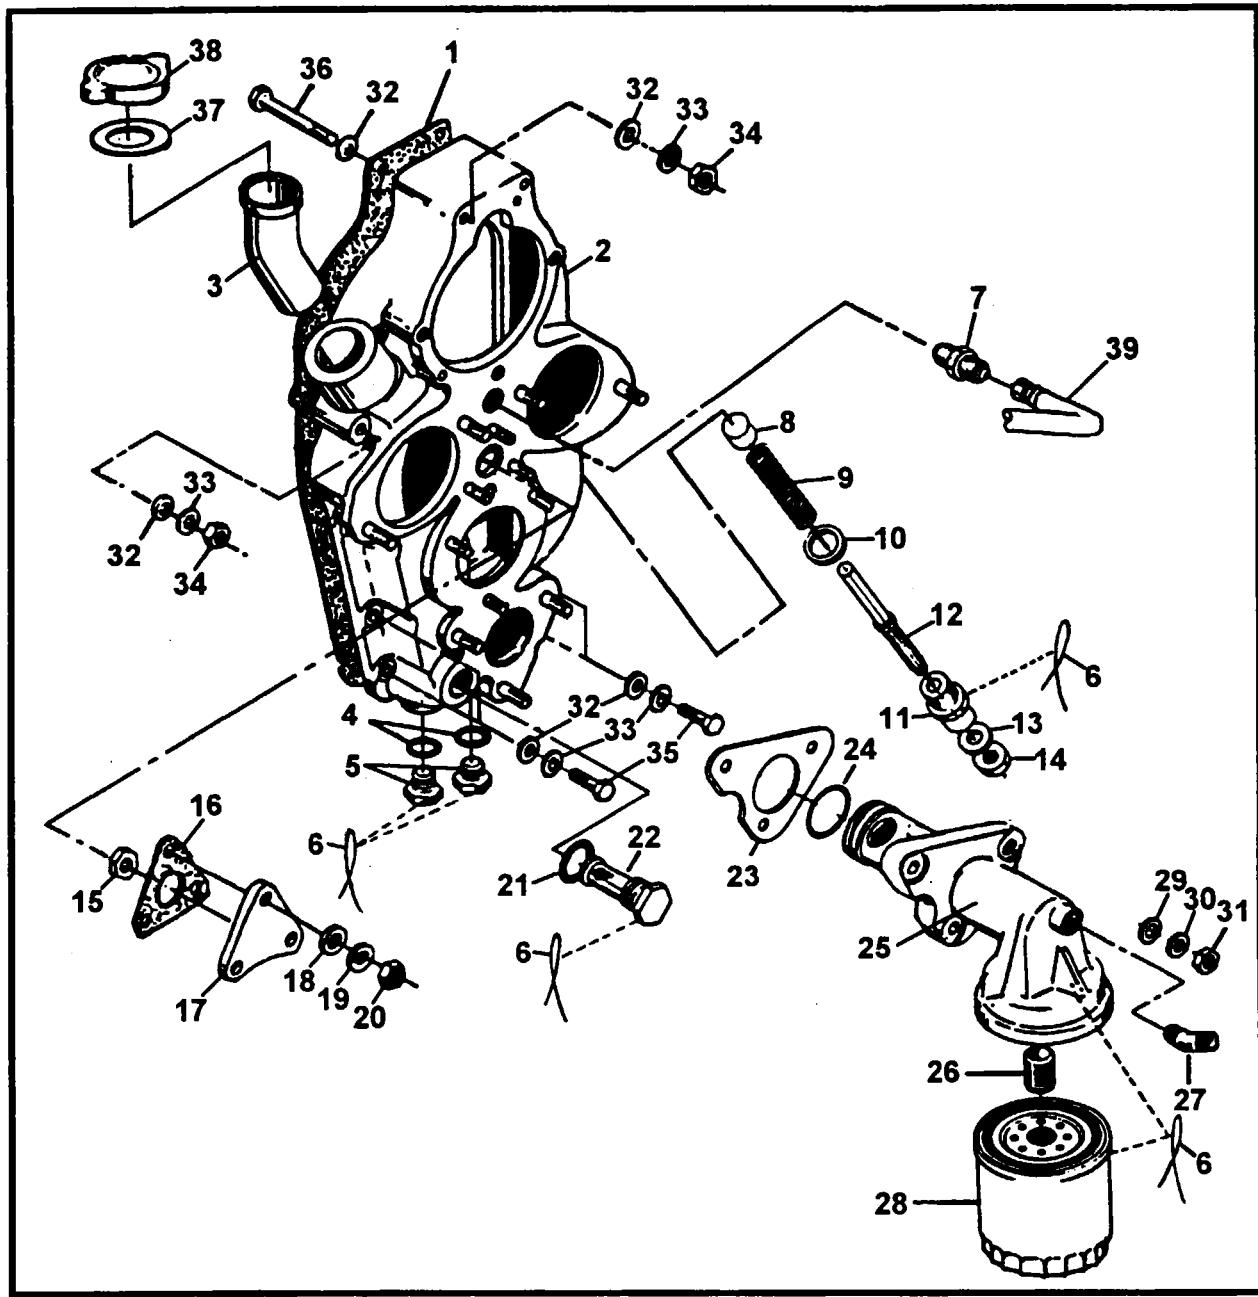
ACCESSORY CASE ATTACHING PARTS (LTSI0-360-RB)
